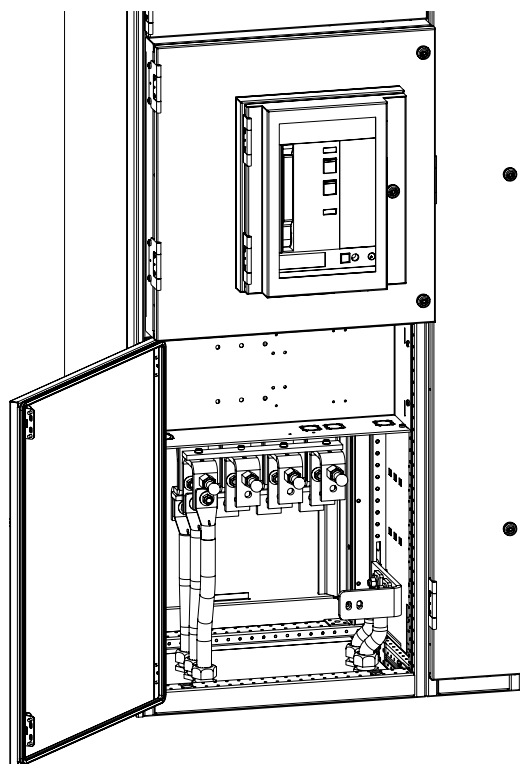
Example of cable connection in incoming / outgoing ACB unit
